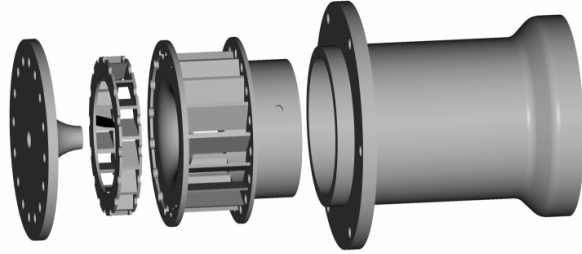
Three Dimensional Solid Model of the Premixer Assembly
